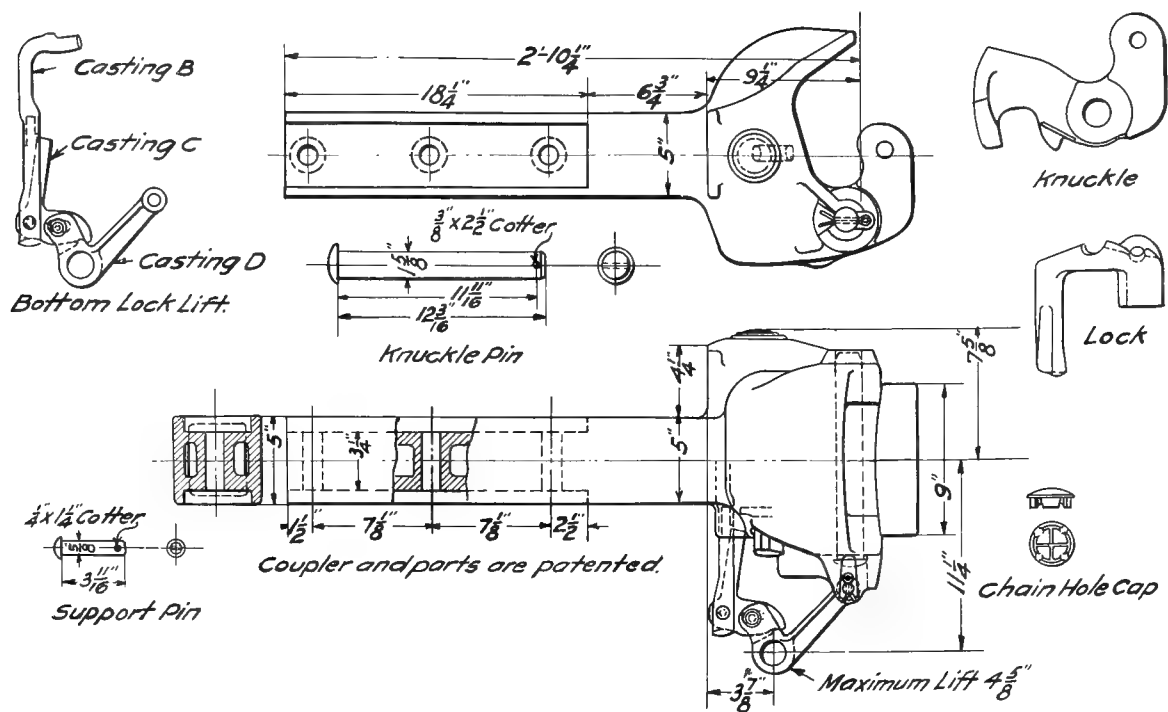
Sharon Bottom Operating Passenger Coupler and Parts. National Malleable Castings Company.
